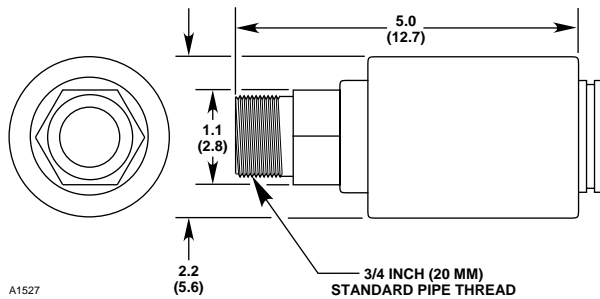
C7066E Sensor Dimensions in Inches (Centimeters)
